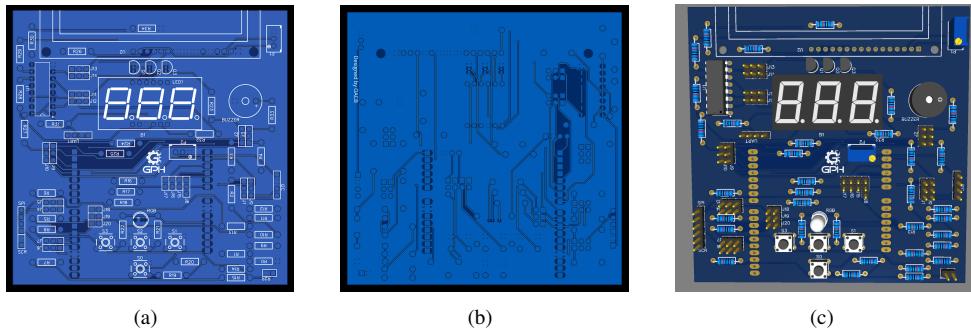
Top layer (a), bottom layer (b) of the PCB and 3D model (c) of the shield.
